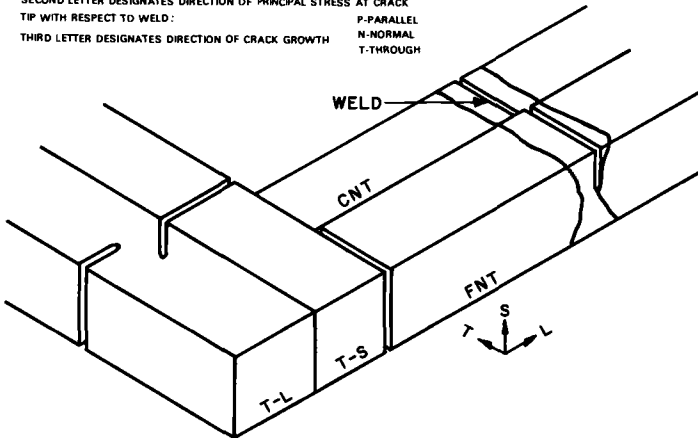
Notch bend specimens in plain and welded plate.
